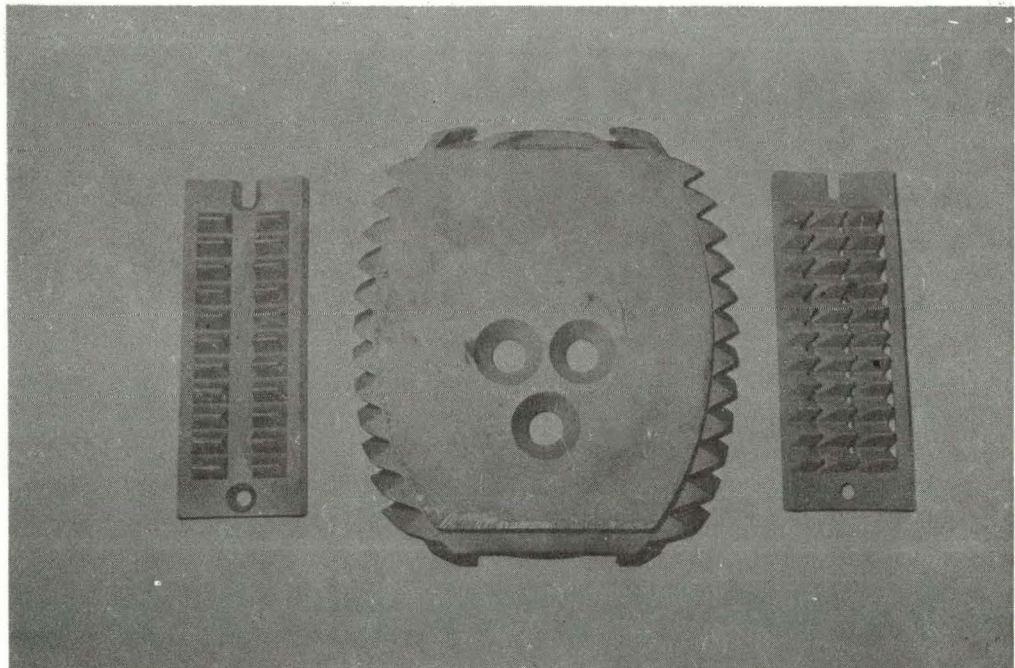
NEW GORATOR ROTOR PLATE AND TWO OF TEN LINER BARS
